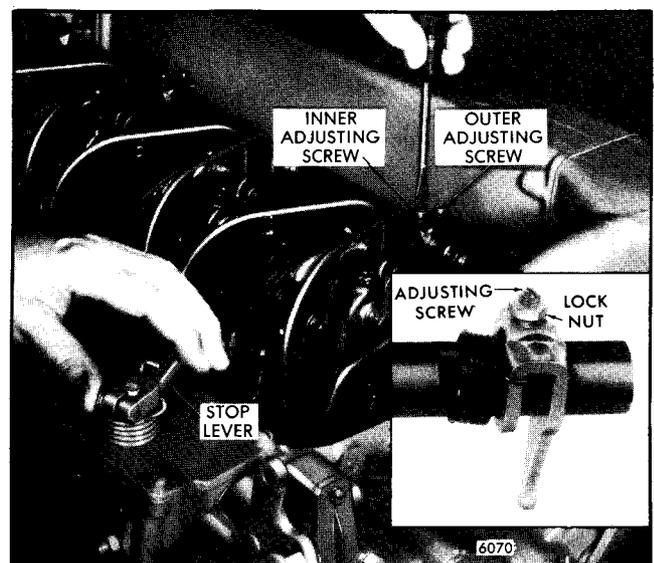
Positioning the Rear Injector Rack Control Lever
